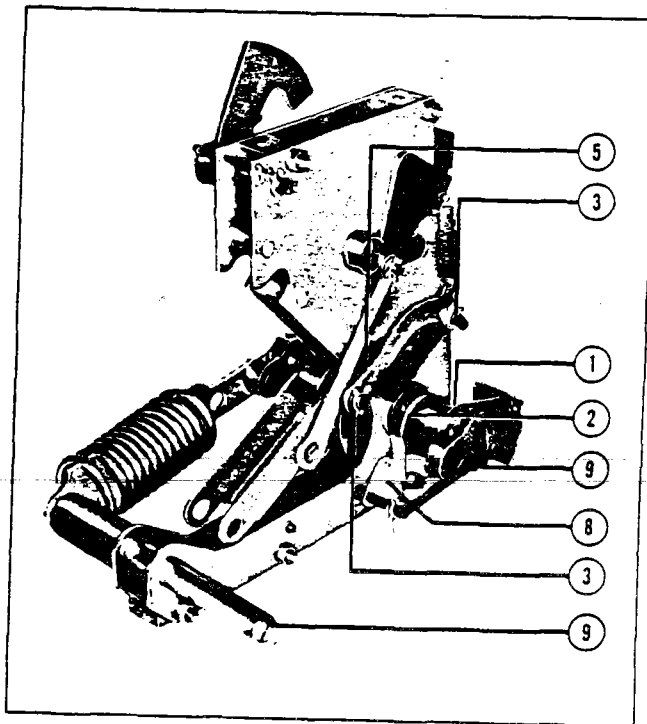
Lubrication Points on Left Side of Mechanism (383034)
